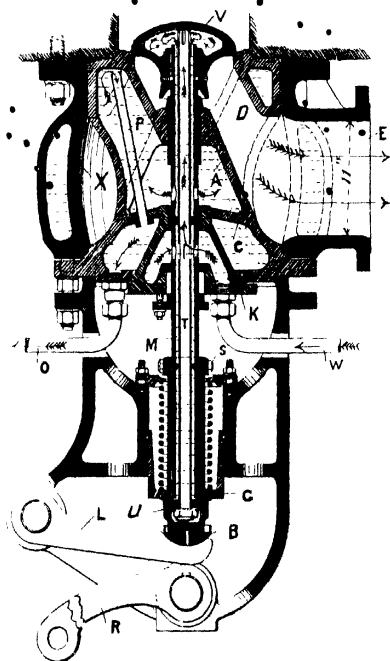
Water-cooled exhaust valve for 35-in. diam. Nurnberg gas engine with rolling cam and eccentric operating gear
